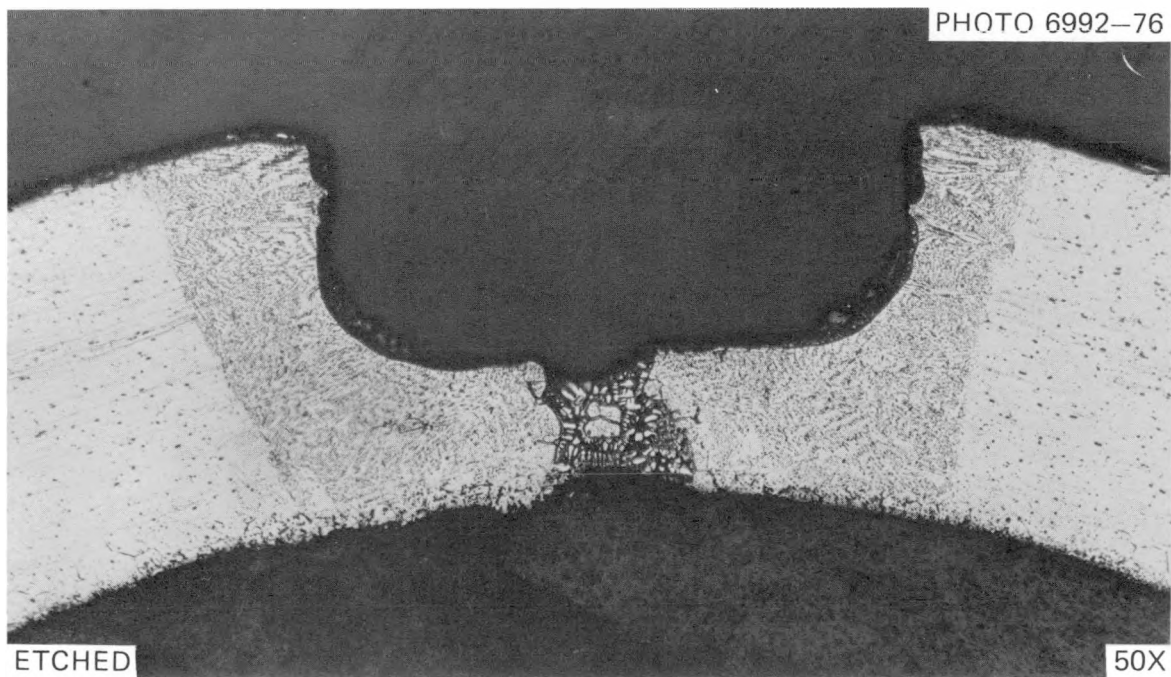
Melting in groove 2 of fuel simulator 2828007. Note groove is centered in tube seam weld.
